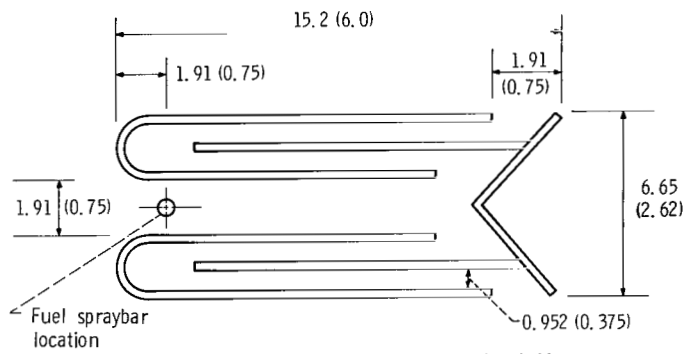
Cross-section sketch of carbureting V-gutter designs. Dimensions are in centimeters (in.).
